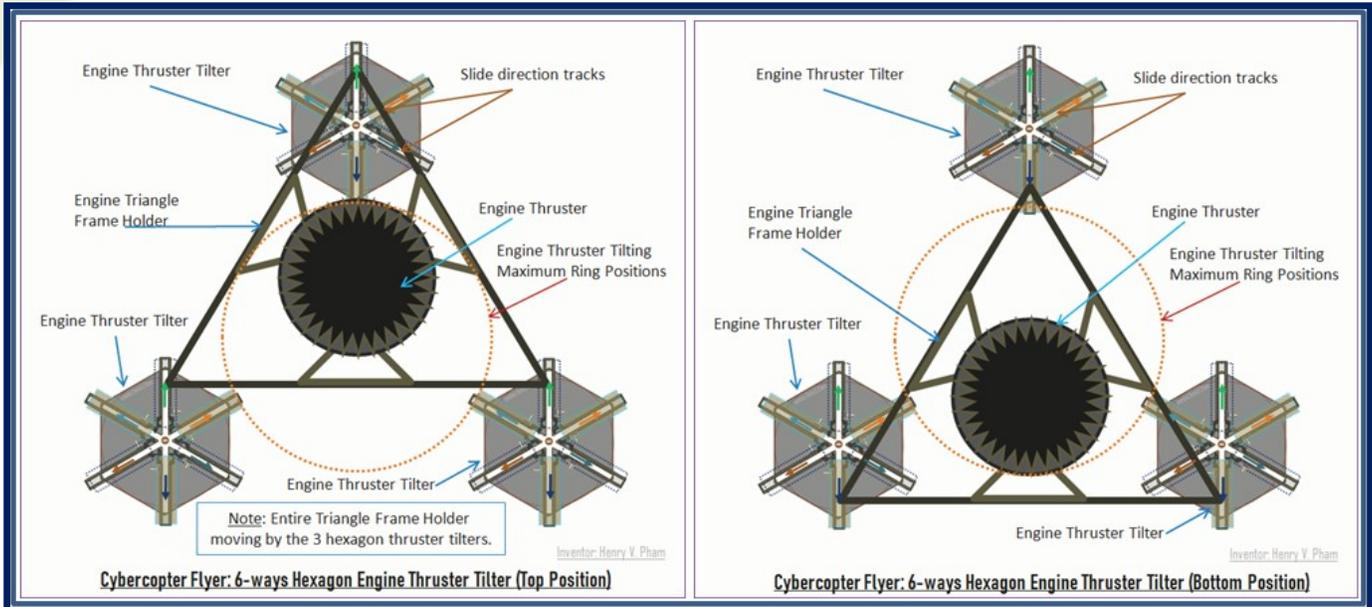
Cybercopter Flyer Hexagon Engines Tilter Mechanism Operating View 1
